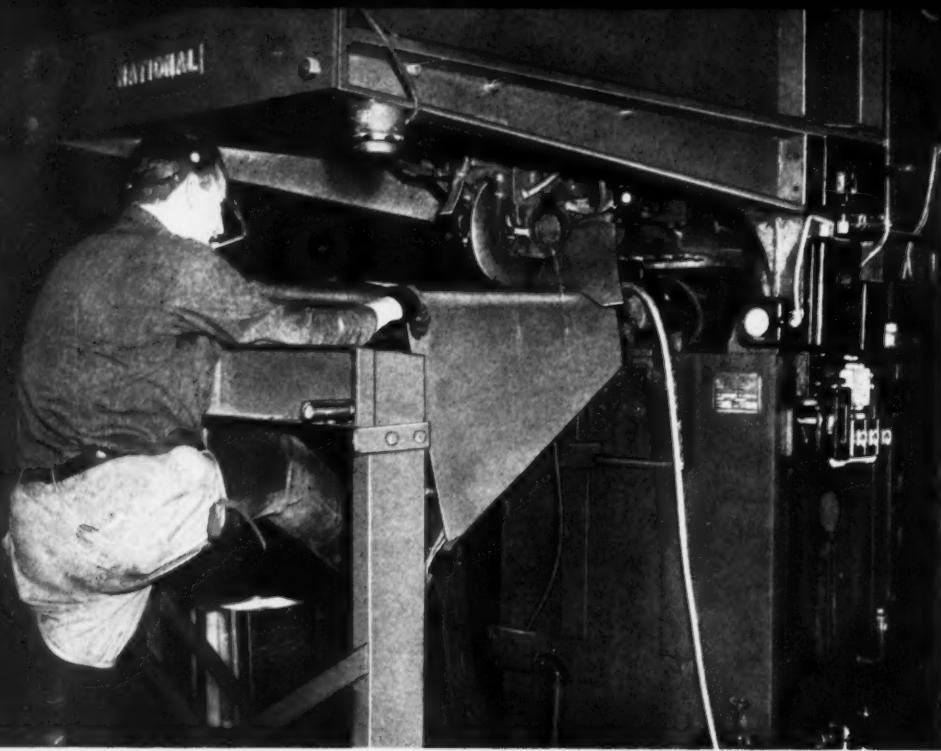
Seam-welding Machine Provided with a Roller Electrode that is Moved Back and Forth over the Work by Hydraulic Means
